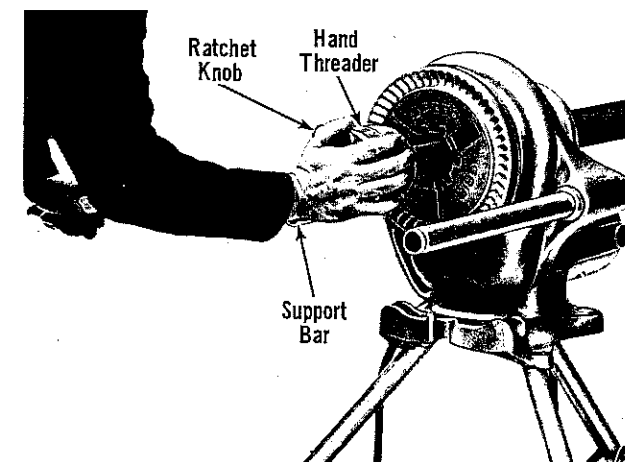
Pushing Hand Threader onto Pipe to Engage Dies.
